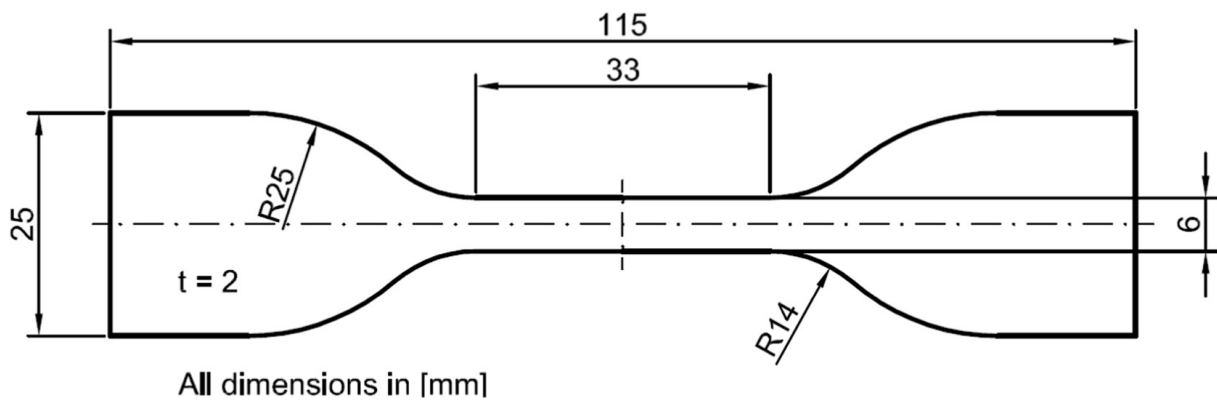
Dimensions of tensile test specimen according to ASTM D412. Adapted from [119]
